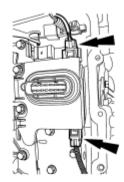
Pressing Tab & Disconnecting Connector Courtesy of FORD MOTOR CO.
